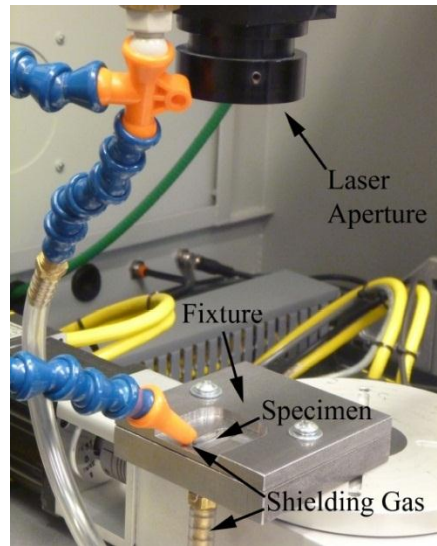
Laser set-up for processing NiTi strip. Strip material was clamped in fixture with Ar shielding on both the top and bottom to prevent oxidation.
